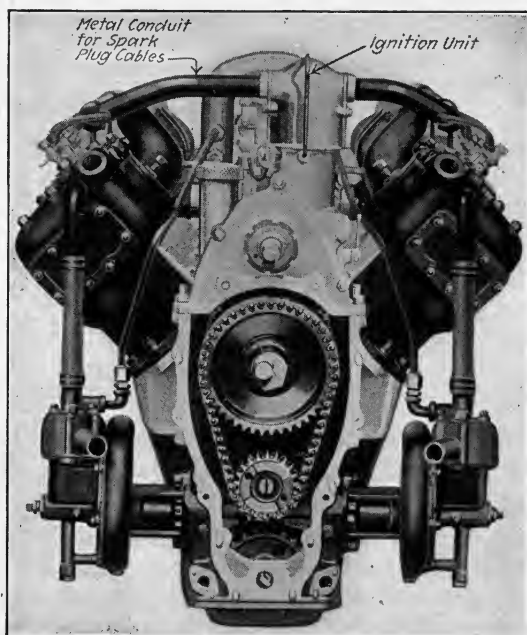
Cadillac eight-cylinder engine showing ignition system.
